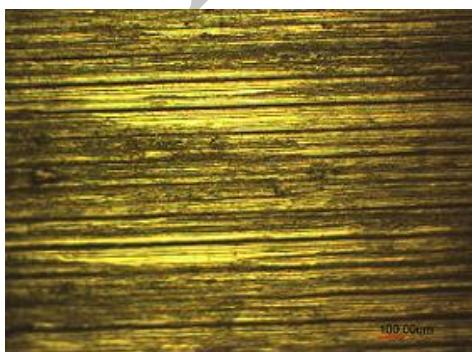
Optical microscope image of the workpiece surface after machining process by micro-texture tool (parallel the cutting edge)
